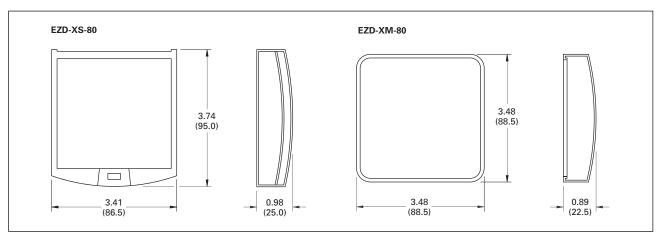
EZD-XS-80 and EZD-XM-80 Series Dimensions in Inches (mm), Drawing Number MD05013009E
